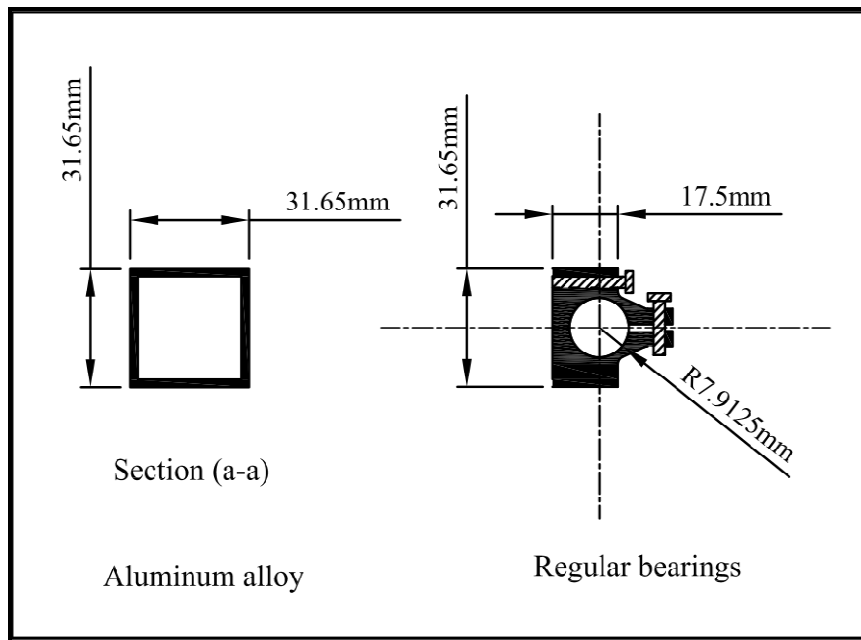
Sections of a lamina and the regular bearing of the University of Ottawa
